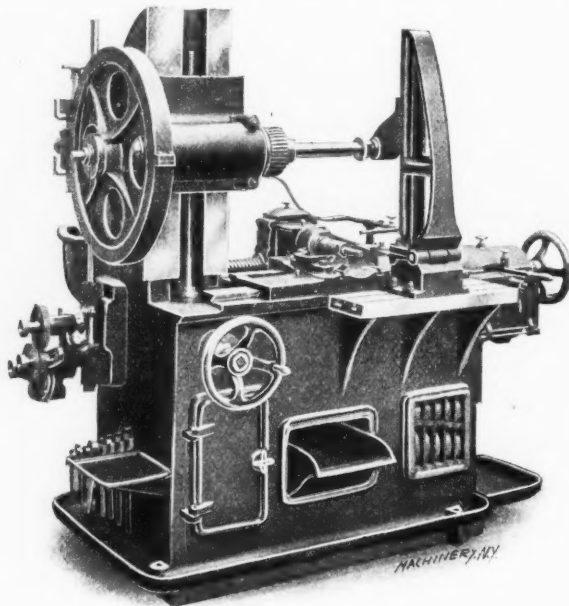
The Reinecker Automatic Spur Gear Cutting Machine.
